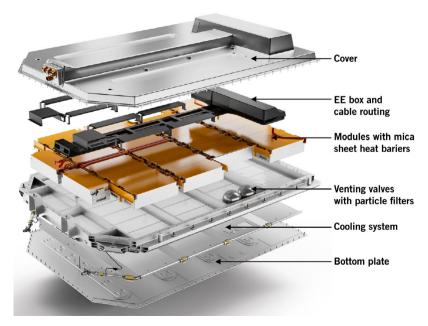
Exploded view of an exemplary high-voltage battery pack with design features to prevent thermal runaway (@ FEV)
